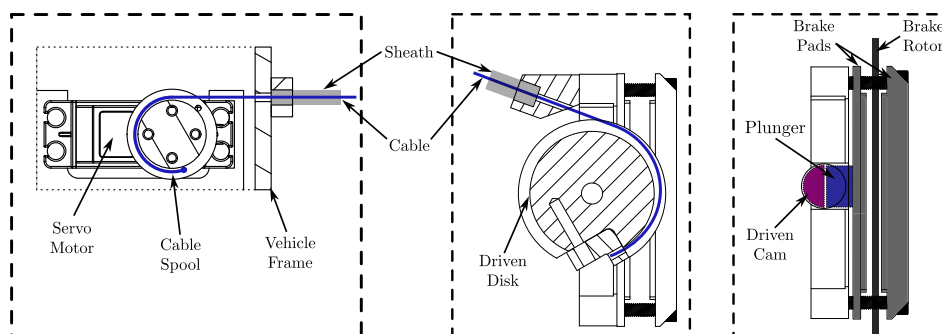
Brake-by-wire system diagram, depicting the chassis-mounted actuator (left), knuckle-mounted caliper (center), and the interworking of the cam-based brake caliper (right). The chassis-mounted actuator drives the cable spool creating tension on the cable, where the cable is connected to the driven disk on the caliper through a cable sheath. The driven disk rotates the driven cam in caliper (right) pushing the plunger and inner brake pad towards to brake rotor.
